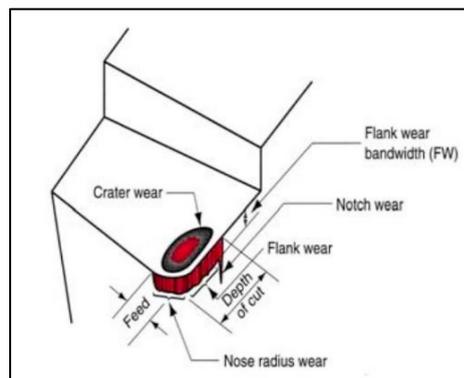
Effects on Cutting Tool in Improper Machining Conditions [20]
